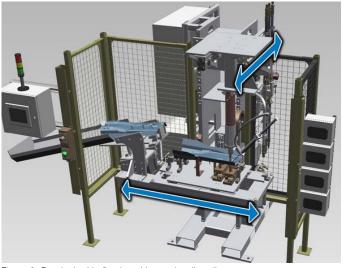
Part locked in fixed position and rodless linear actuators move Projection weld actuator and ServoPlace actuator into position.
